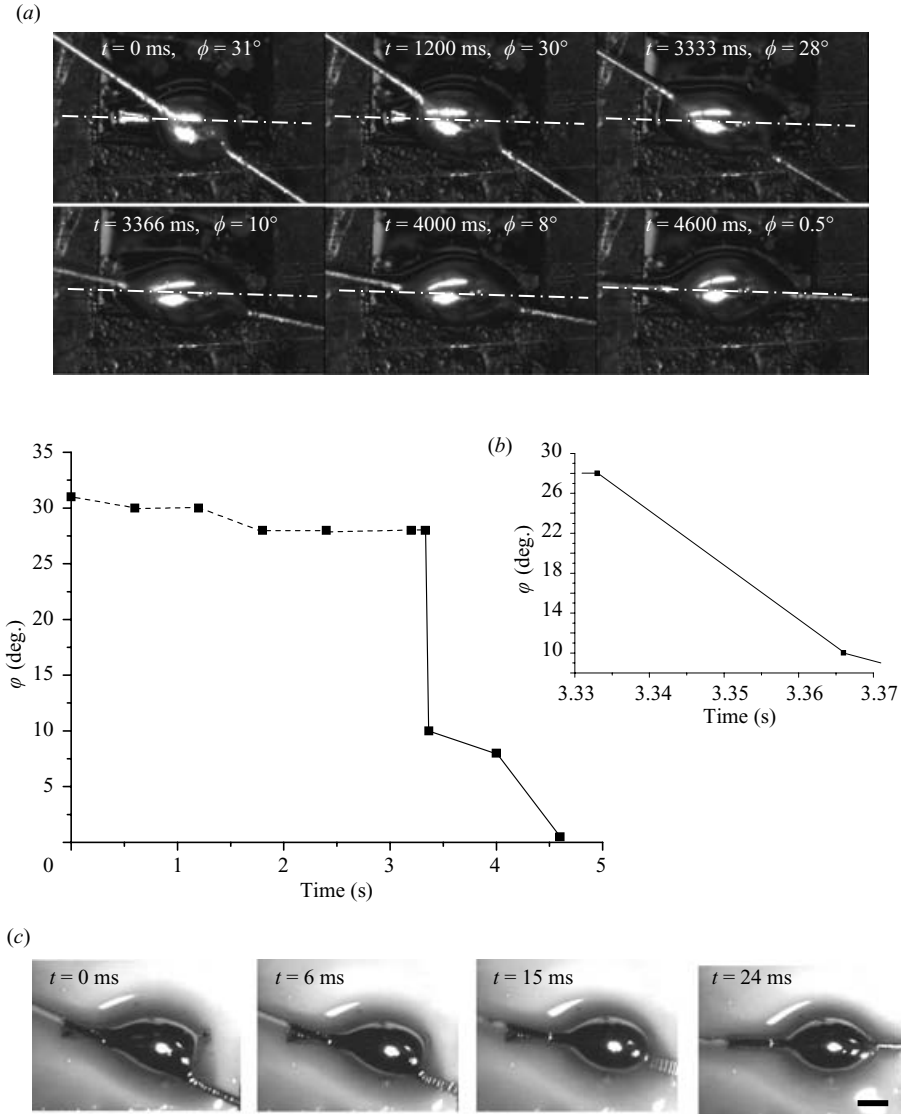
(a) Top view of the process taken by the CCD camera, which illustrates the mechanism of the optical fibre self-assembly (spreading and surface-tension-driven) on a longitudinal pad. The pad dimensions: $w \times 2a = 0.4 \times 4 \text{ mm}^2$, the solder volume: 0.67 mm^3 , and the fibre length 3 cm. The bar in the figure is 1 mm. (b) The angle ϕ between the fibre and the pad centrelines versus time. Symbols, experimental data. The dashed-dotted line, stage (i); the solid line, stage (ii). The insert shows in detail stage (ii) which lasts about 30 ms. (c) Surface-tension-driven fibre alignment, stage (ii). Pad dimensions $w \times 2a = 0.4 \times 4 \text{ mm}^2$, solder volume: 0.67 mm^3 . The fibre length was 3 cm. Top view of the alignment process taken by the CCD camera (at 250 f.p.s.). Time is reckoned from the beginning of stage (ii). The bar in the figure is 1 mm.
